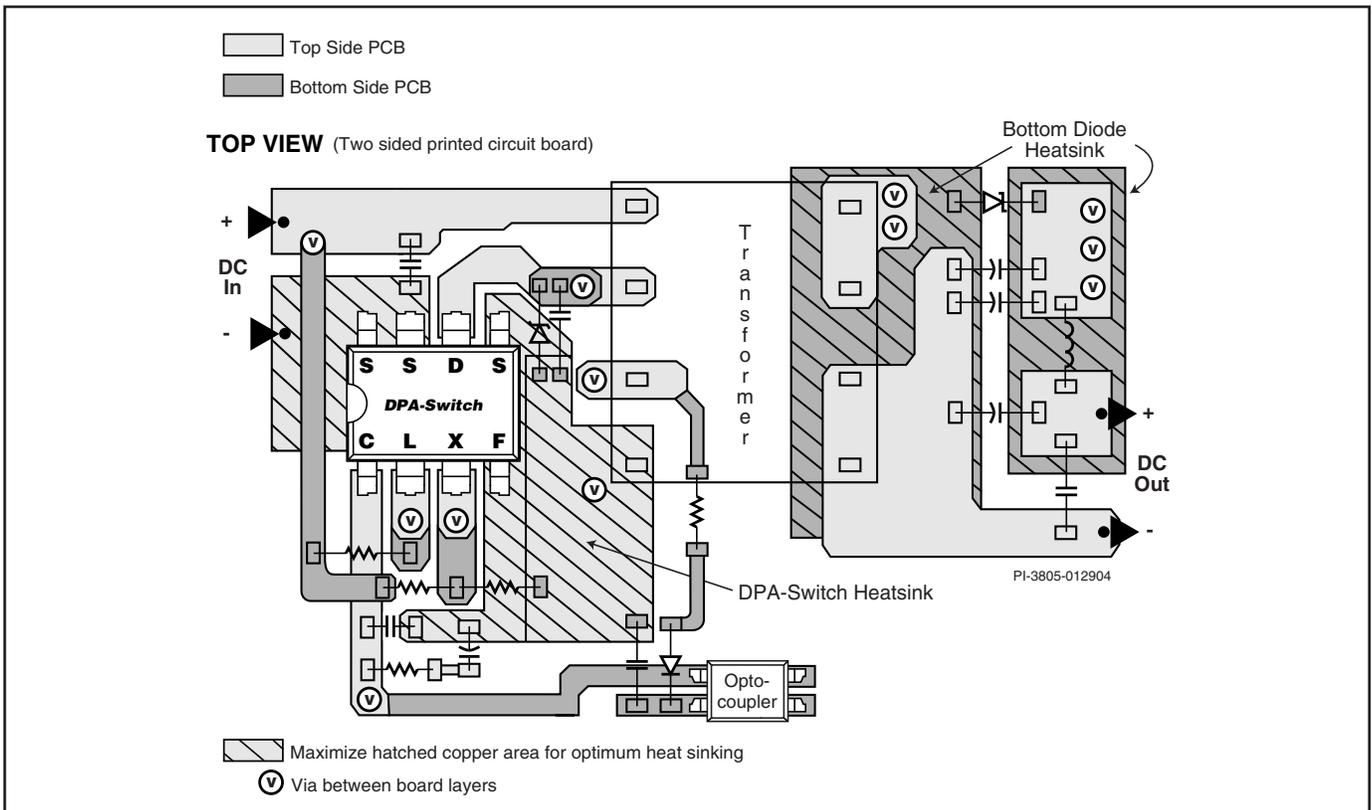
Layout Considerations for DPA-Switch Using G Package.
